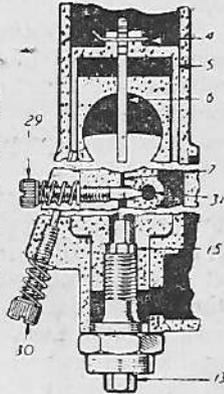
Diagrammatic section of carburettor showing only the lower half of the throttle chamber with the throttle slightly open and the internal primary air passage to the main jet and pilot system.
